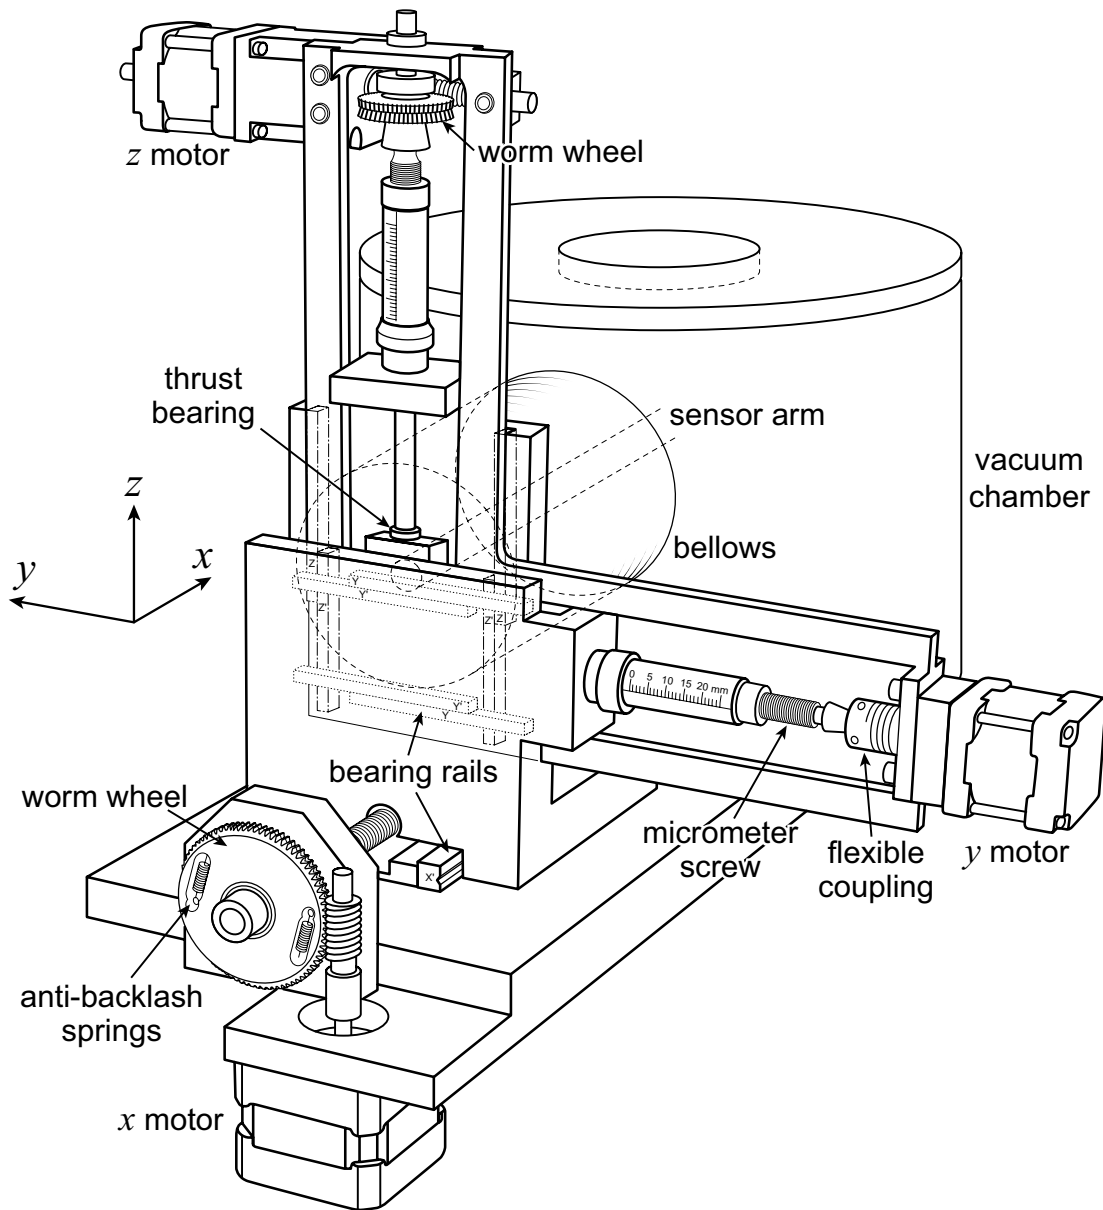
Sketch of the three-axis stage that moves the sensor arm. Stepper motors drive micrometer screws to generate linear motion. For the x and z axes, worm gears first reduce the motors' rotation; for the y axis, the motor is coupled directly to the micrometer screw.
